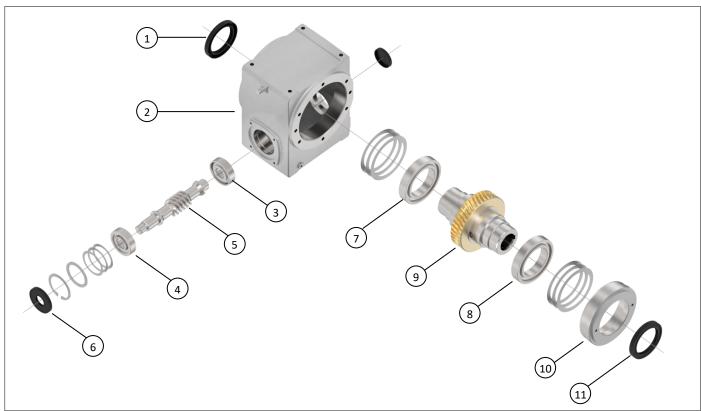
Exploded view for sizes S63.1 and S80.1 (deviating structure without SR bearing cover for sizes S40.1 and S50.1)
